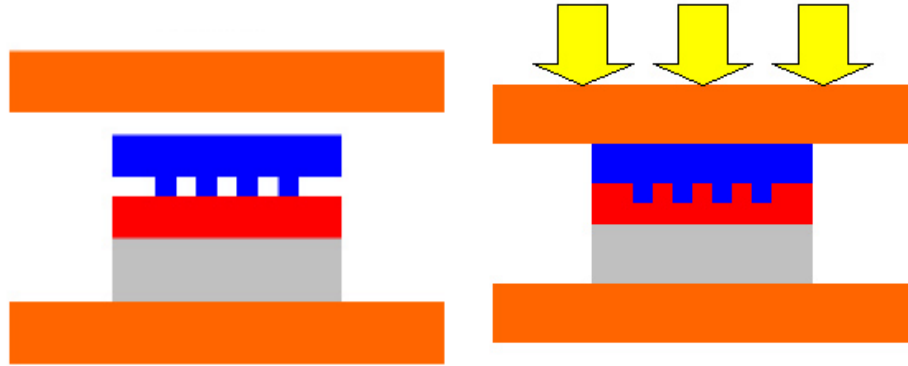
The process of thermal imprinting. The top and bottom imprint plates were heated to the imprint temperature (left); Force was applied to the plates such that the desired pressure between mold and target sample was achieved (right).
